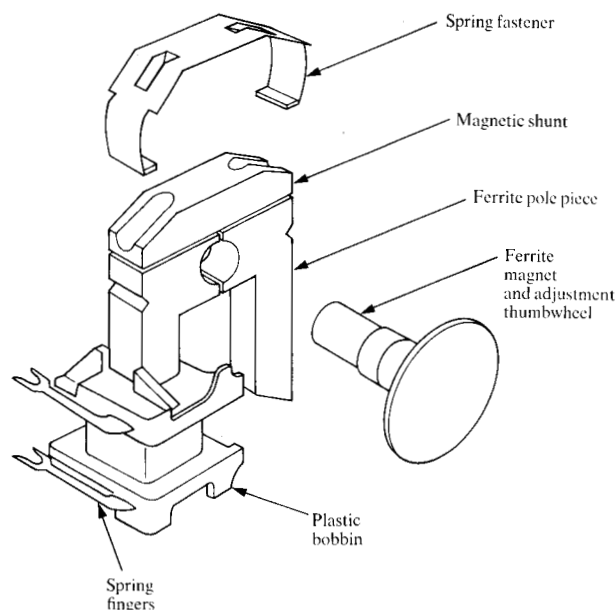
Radial convergence assembly (three required for each cathode-ray tube). (Note: winding not shown on plastic bobbin. Second bobbin on other leg omitted for clarity.)
